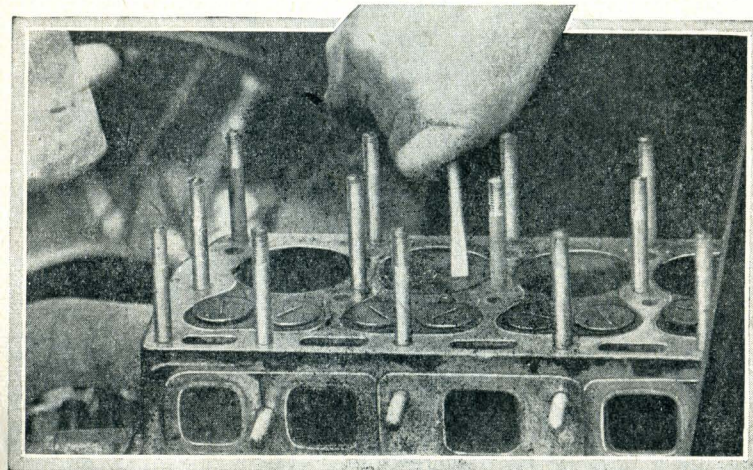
REMOVING CARBON FROM PISTON CROWNS
